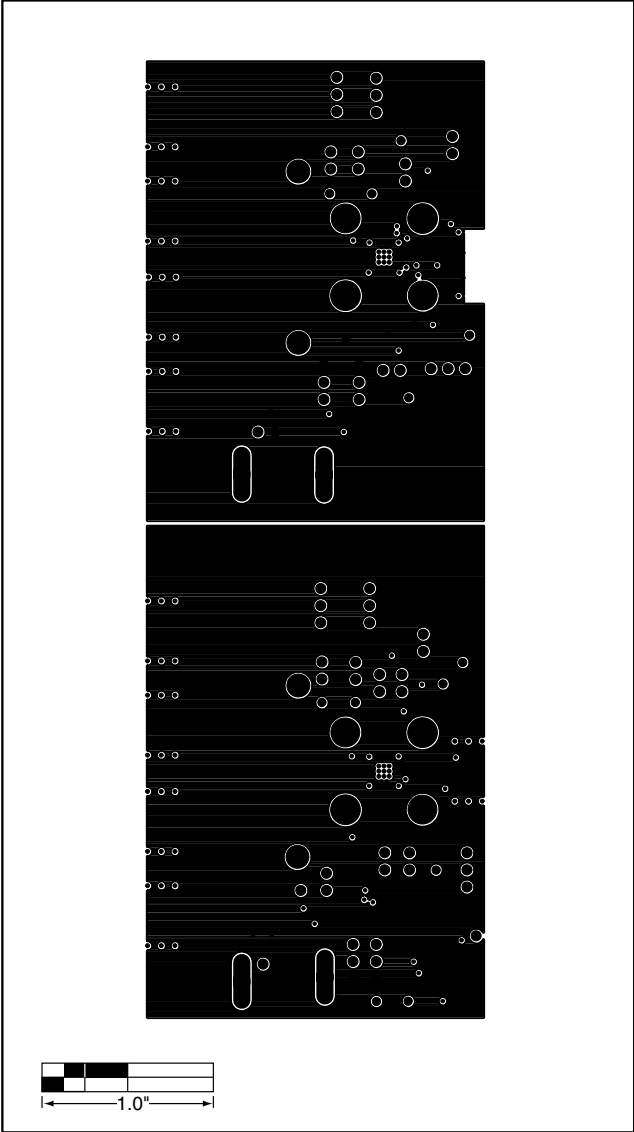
MAX3273 EV Kit PC Board Layout—Power Plane
